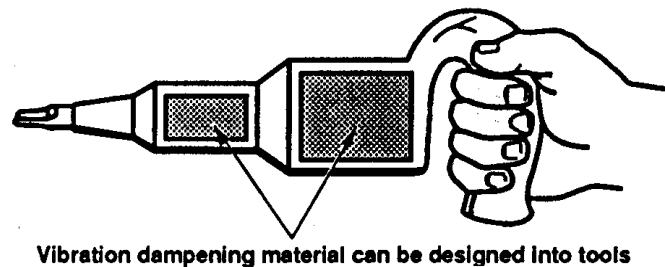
Power or pneumatic tool with built-in vibration dampening.
